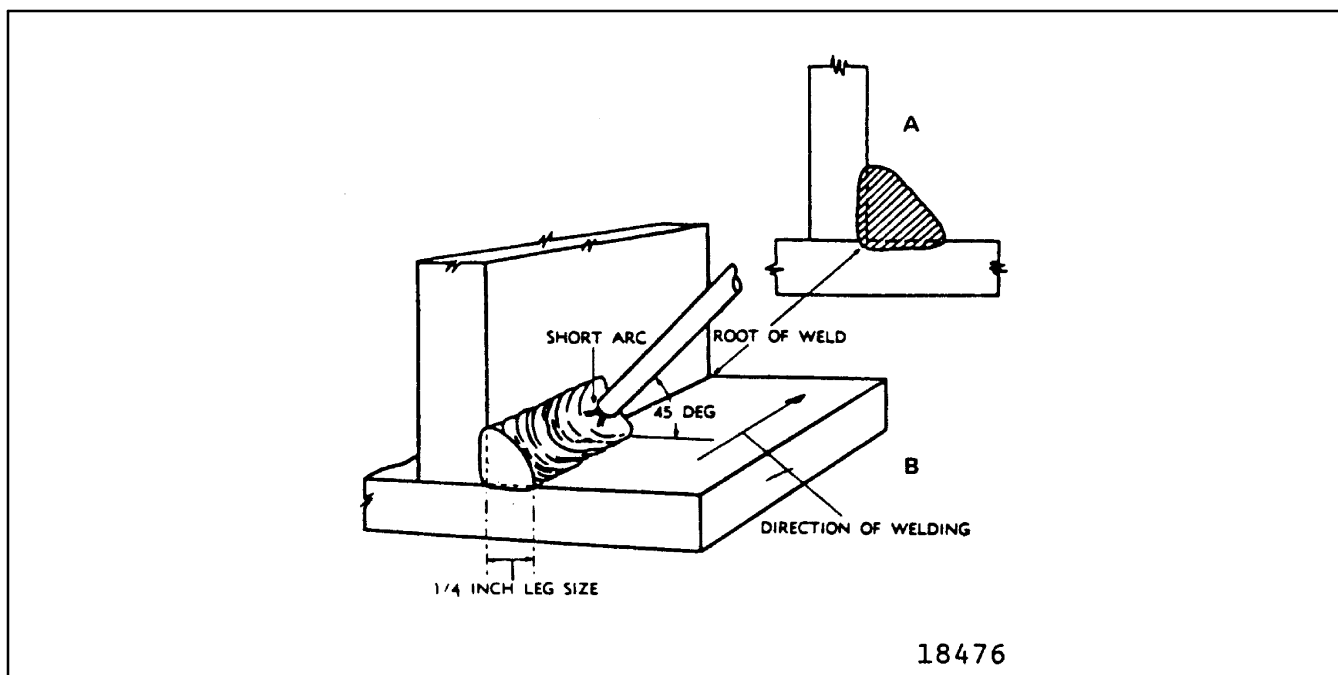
Position of Electrode and Fusion Area of Fillet Weld on the Joint
